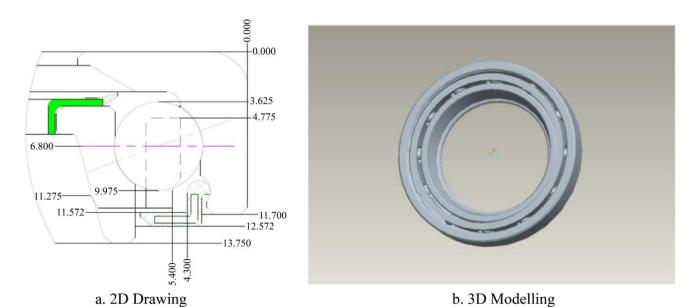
Assembly of AC ball bearings (a) 2D Drawing, and (b) 3D Modelling.
